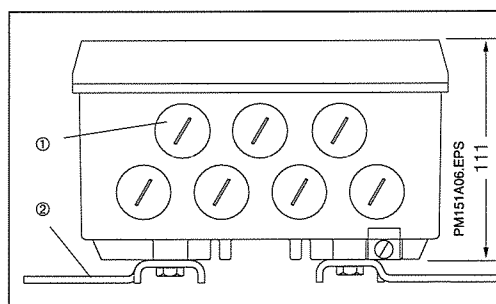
Bottom of field housing with brackets for wall mounting installed
